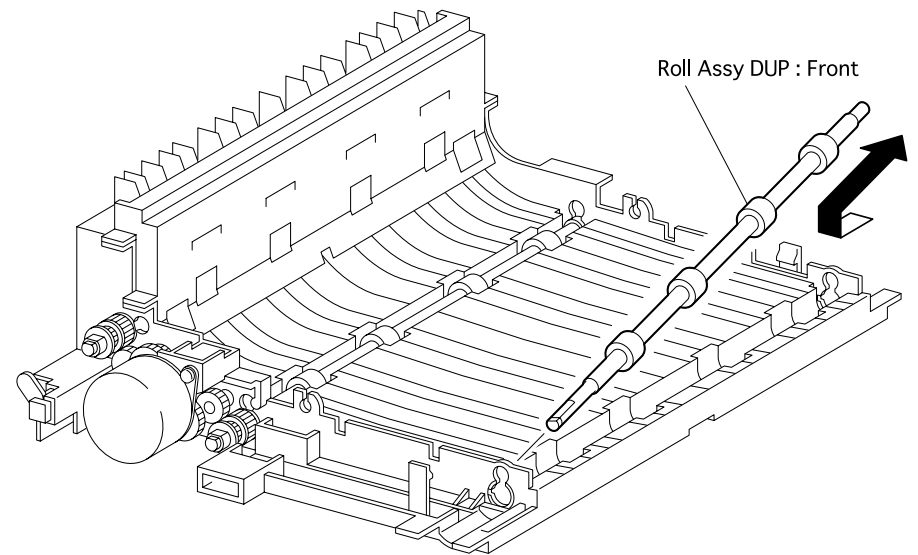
Roll Assy DUP: Front Removal (3) Removal
